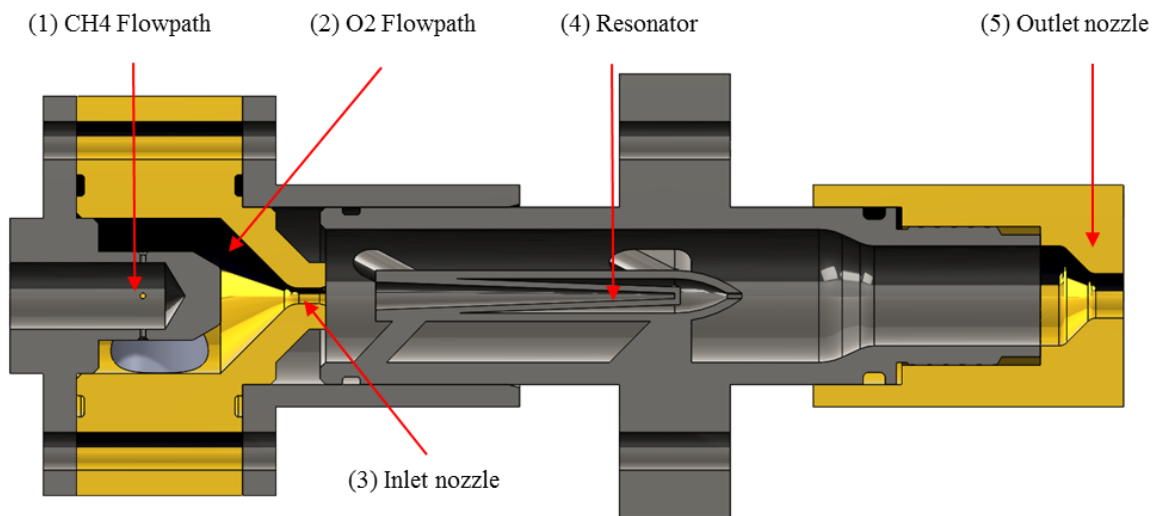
Modular igniter design consisting mainly of injector assembly (1-3), resonator (4) and outlet (5).
